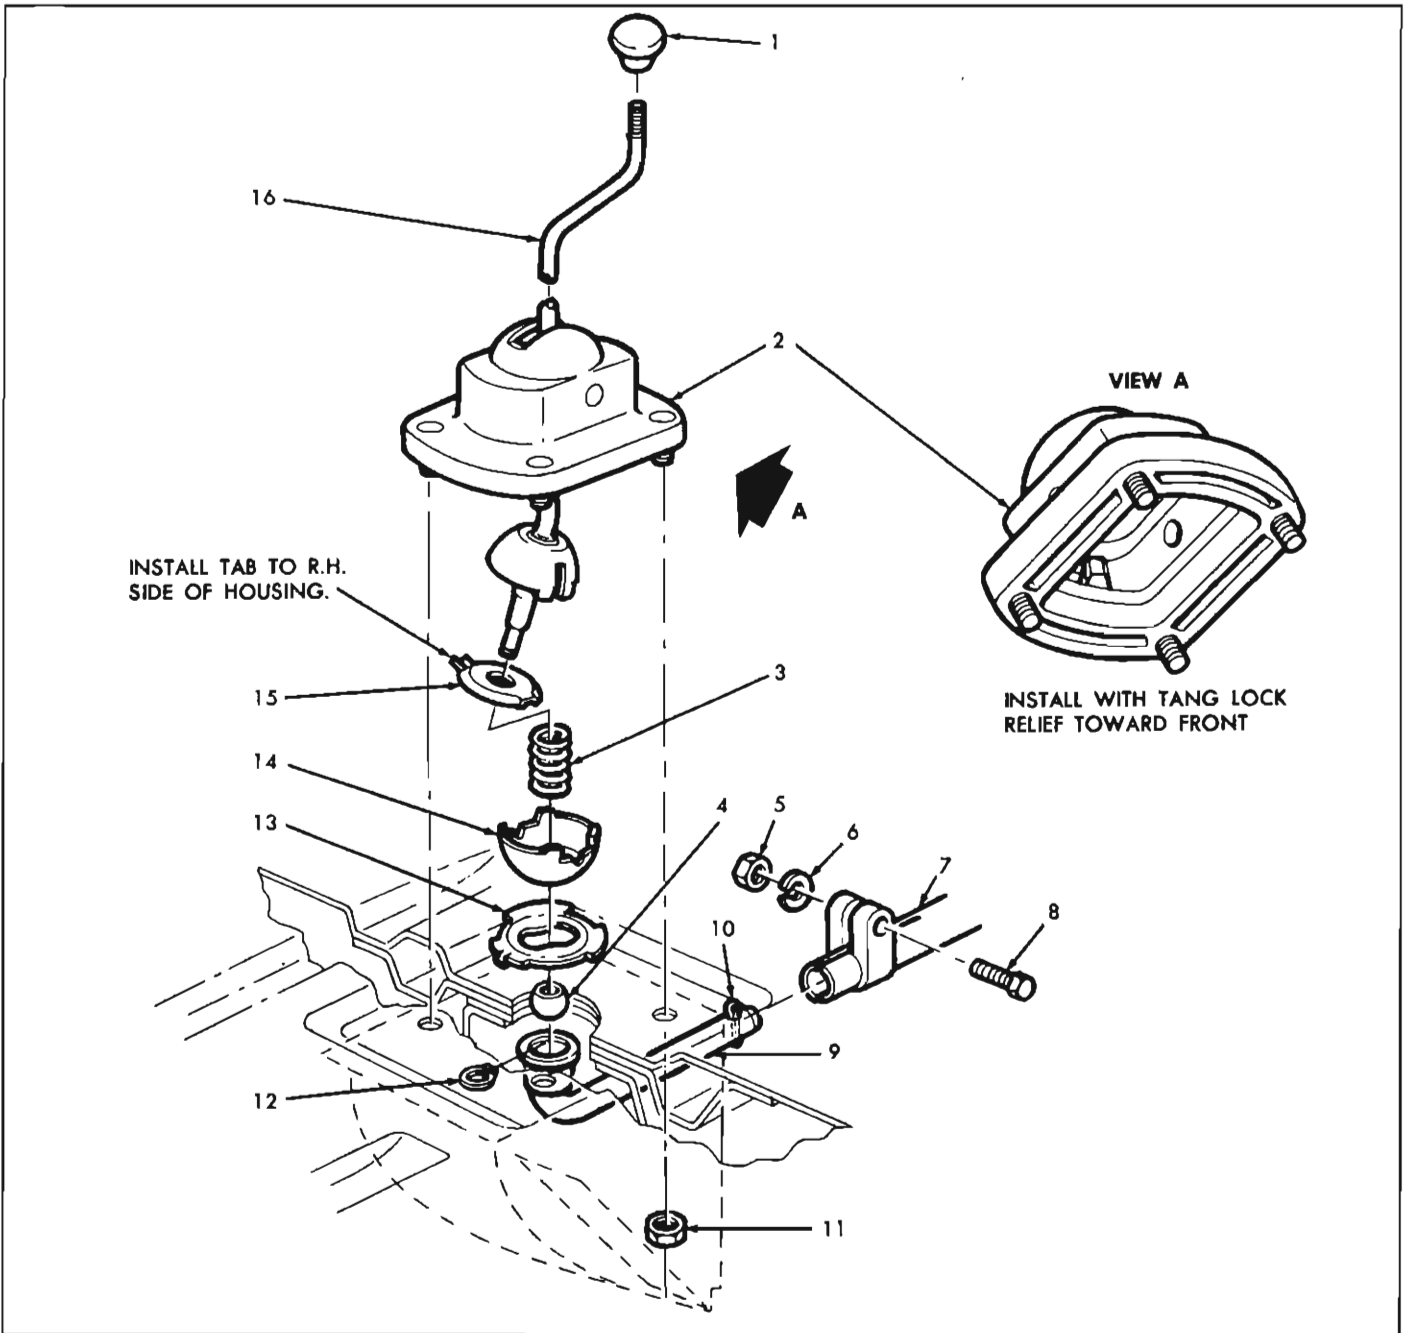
D-2—L.D.F.C. Gearshift Lever and Linkage—Exploded
